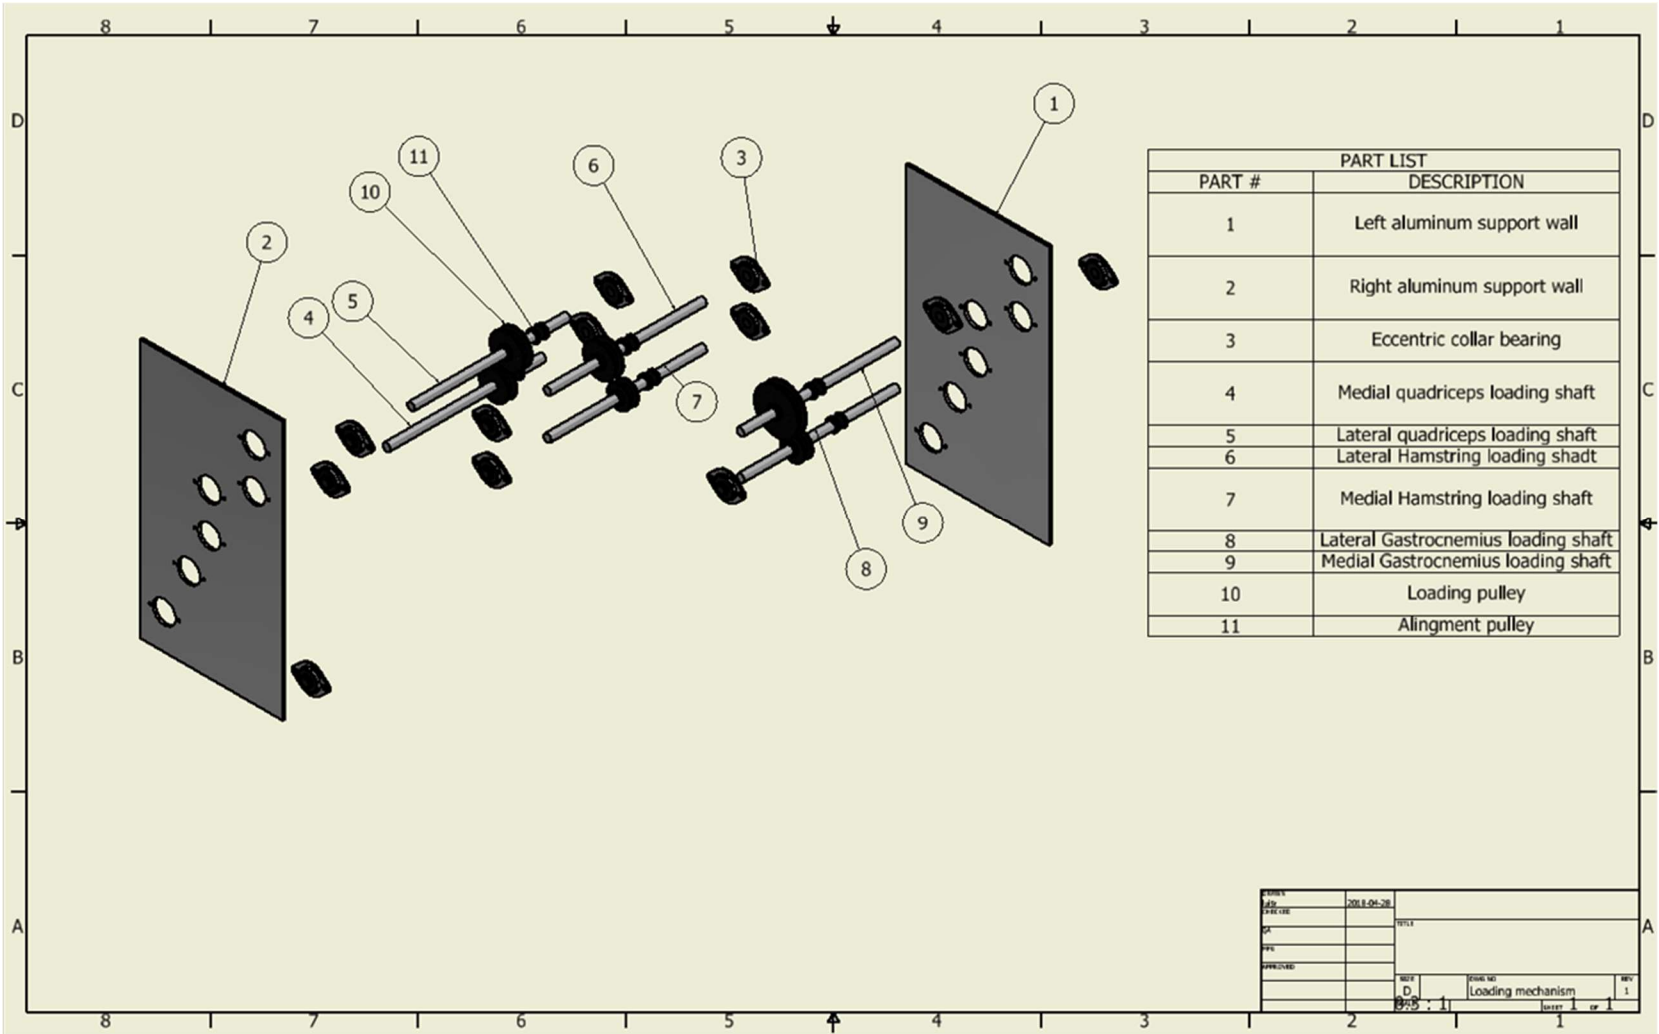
Exploited view of the loading mechanism. These components are located in the back of the simulator.
